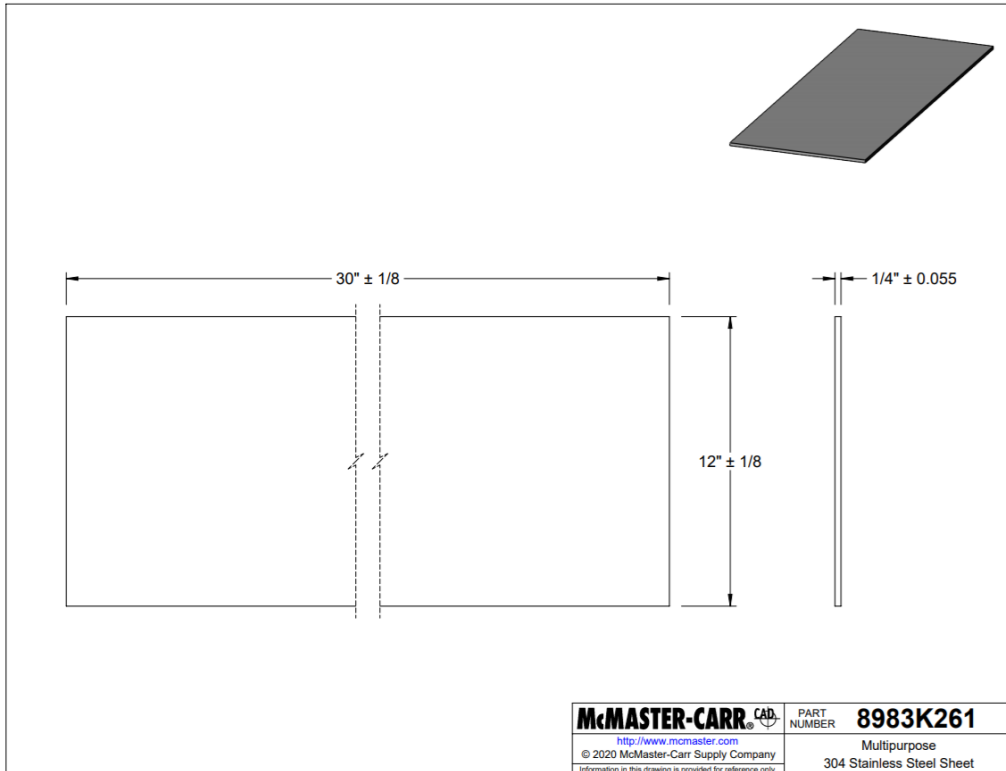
Drawing of Support Pieces for Rungs on Each Section of the Ladder Provided by McMaster-Carr
